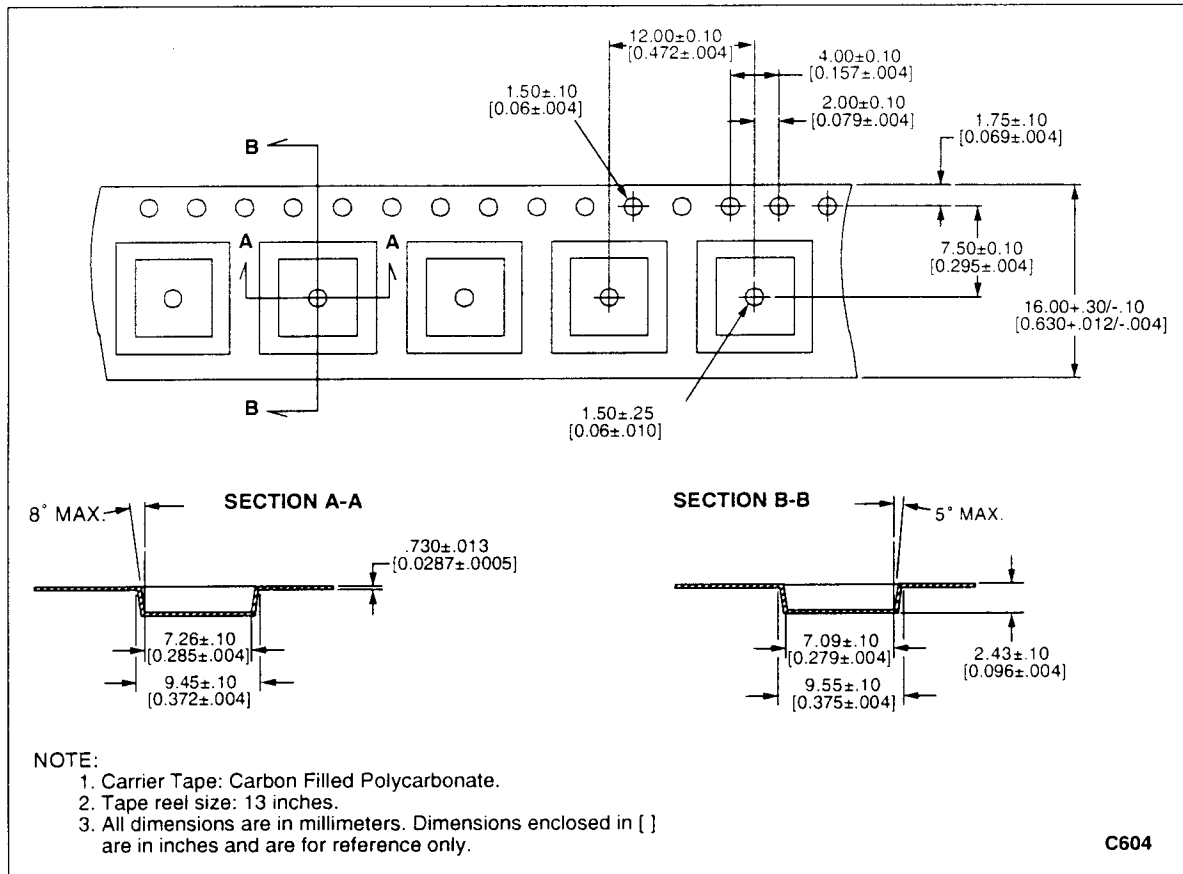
48-Pin TQFP Tape and Reel Dimensions
